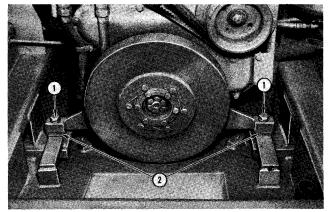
FRONT ENGINE MOUNT 1. Mounting Bolts 2. Shims
